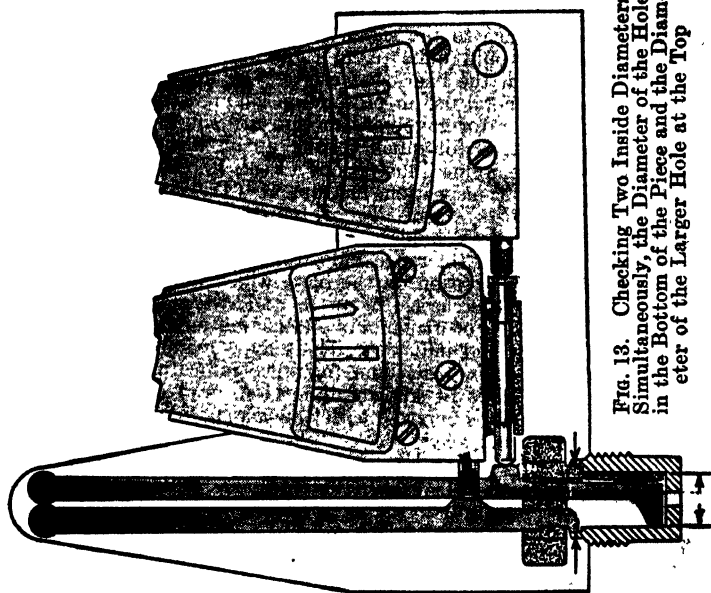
Checking Two Inside Diameters Simultaneously, the Diameter of the Hole in the Bottom of the Piece and the Diameter of the Larger Hole at the Top
